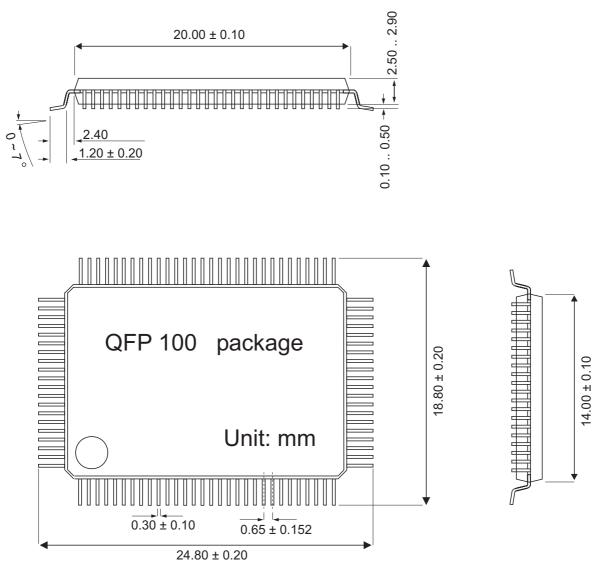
XHFC-2S4U and XHFC-4SU package dimensions
